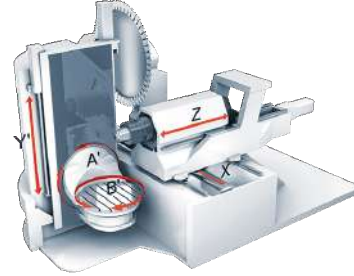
Definition of the machine coordinate system (MCS) for the GROB G350 5-axis machining center. [29]
